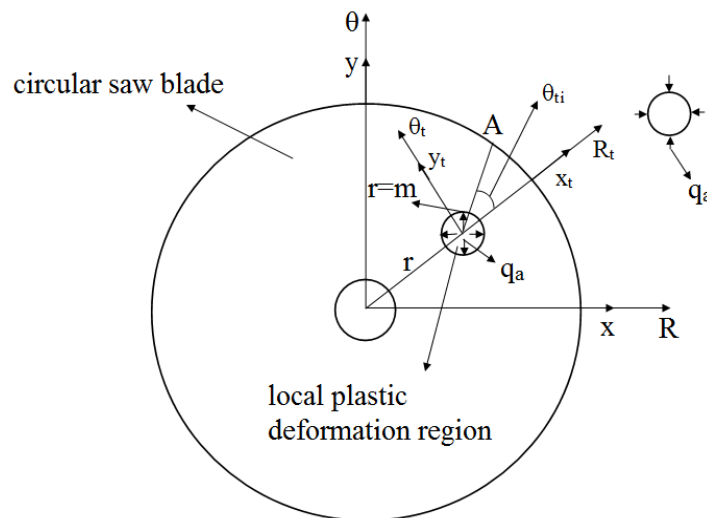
Mechanical model of circular saw blade with a through-hole subjected to uniform radial compressive stress
